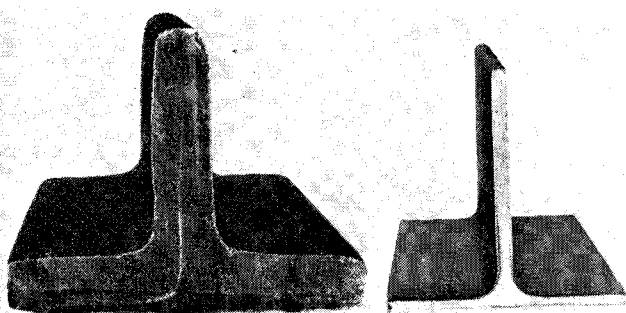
Titanium extrusion as received, and machined part cut from it.
